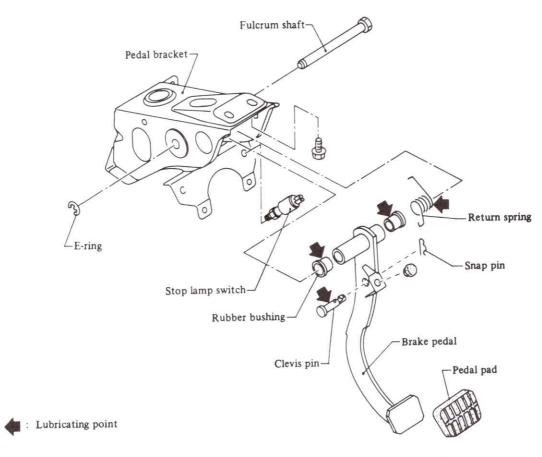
The component parts of the brake pedal assembly (Sec 18)
